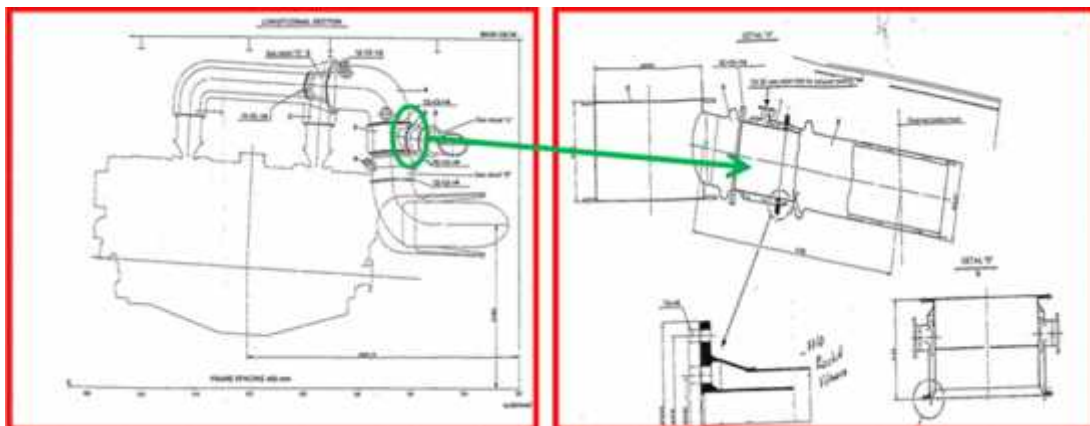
Layout Arrangement of Exhaust Cooling Valve
